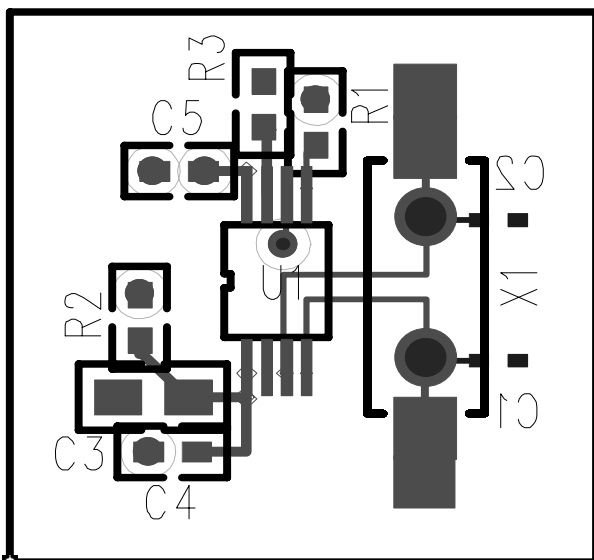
B. ICS840022 PC BOARD LAYOUT EXAMPLE
